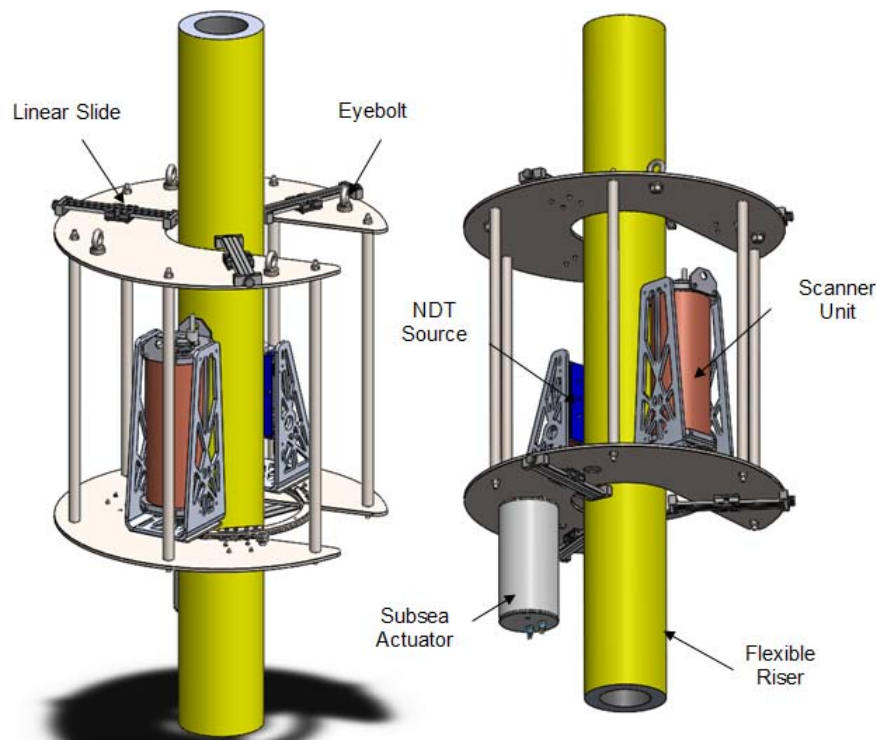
3D CAD model of the prototype robotic inspection system.
